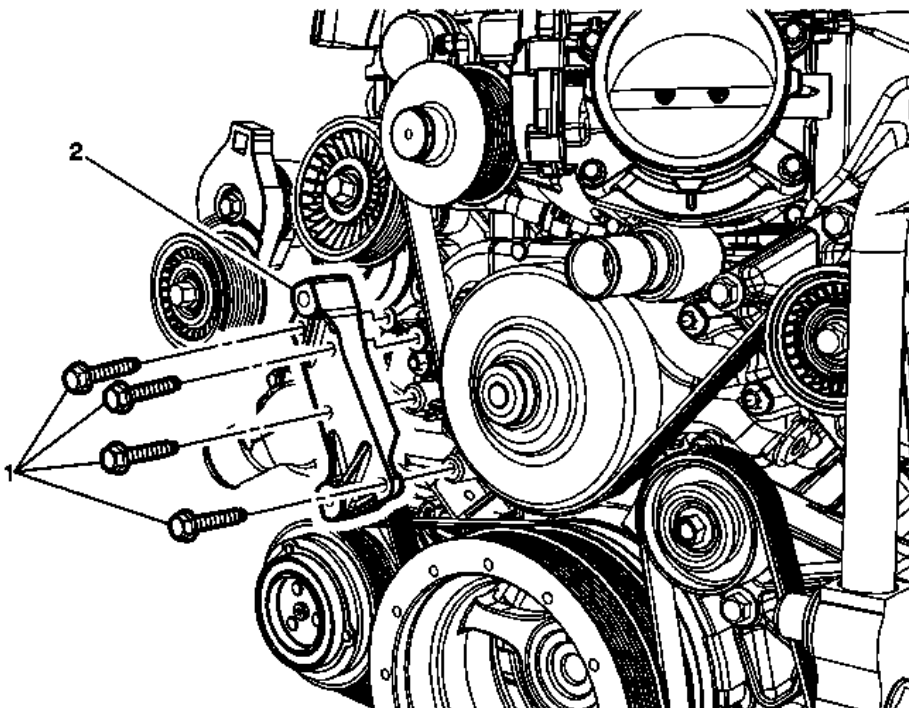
Supercharger Belt Idler Pulley Bracket & Fasteners
